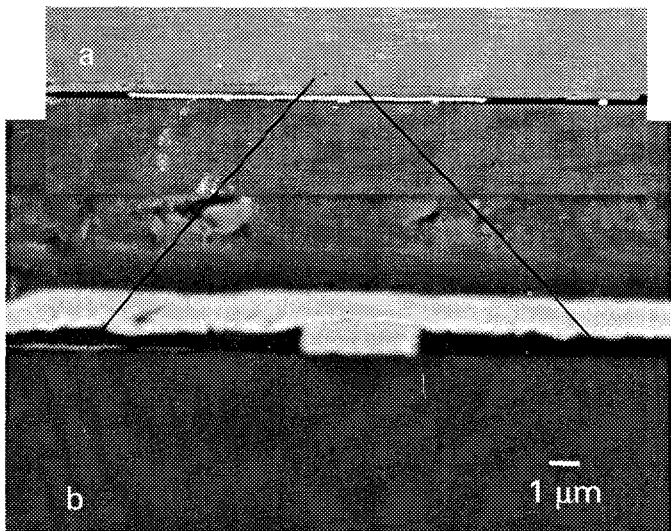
a) Cross-section of unbumped die (Chip2) assembled with a ramp rate of 8.1 °C/s and b) a deformed particle in a higher magnification.
